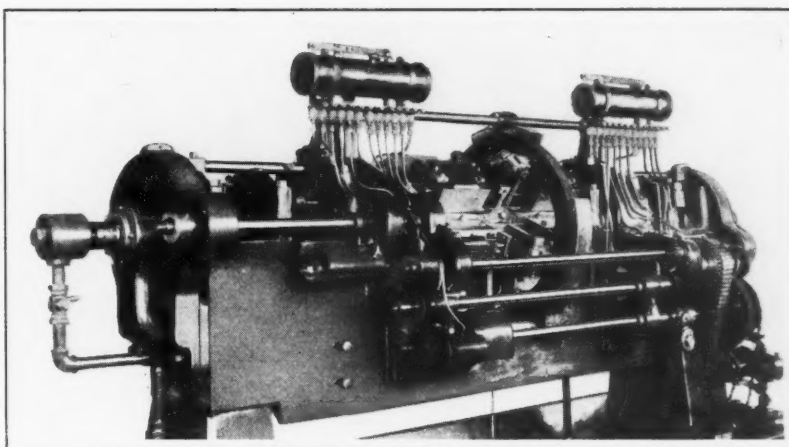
Non-stop Automatic Drilling Machine Equipped for Drilling and Countersinking Hinge Parts
